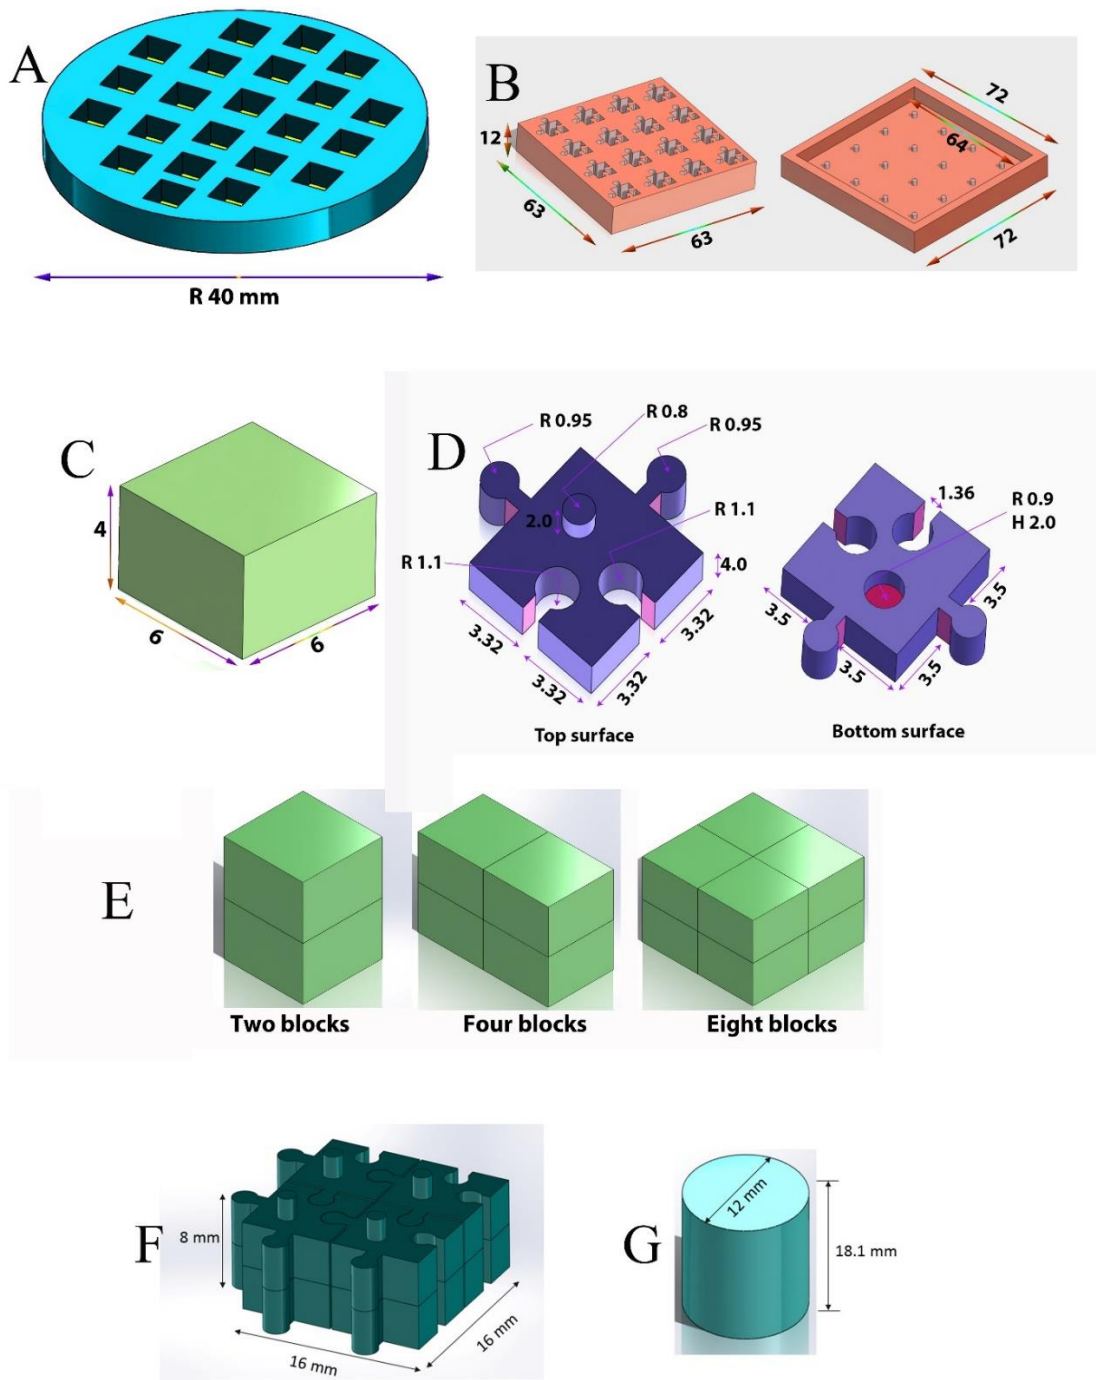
(A) Mold for simple scaffold blocks. (B) Mold for interlocking scaffold blocks. (C) Schematic of a single scaffold block. (D) Schematic of interlocking scaffold blocks. (E) Schematic of assembly of two blocks, four blocks, and eight blocks. (F) Schematic of assembly of eight interlocking blocks. (G) Schematic of the cylindrical scaffold.
